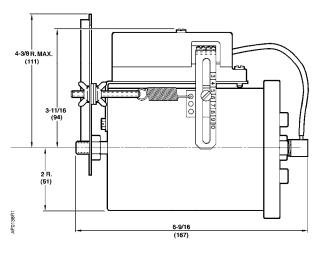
No. 3 Actuator with the RL 147 Positioning Relay Mounted Dimensions.
